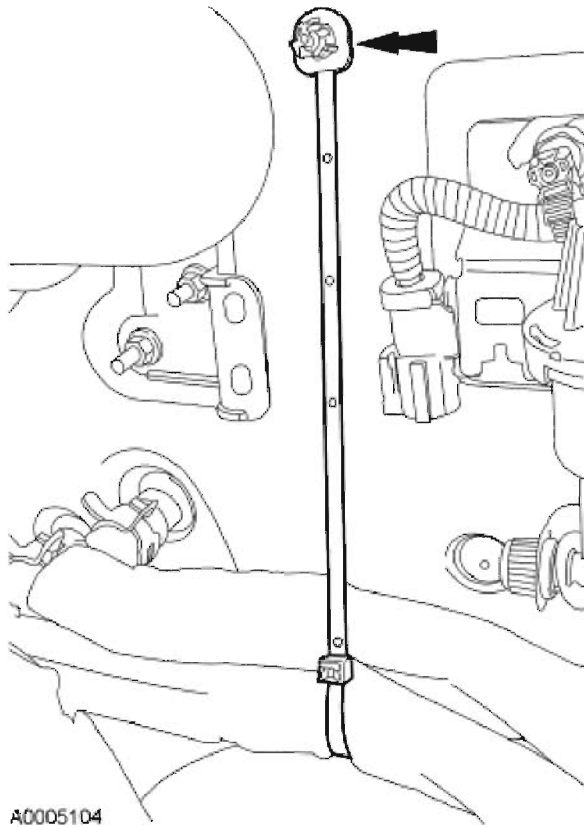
Locating Upper Radiator & Coolant Vent Hoses
